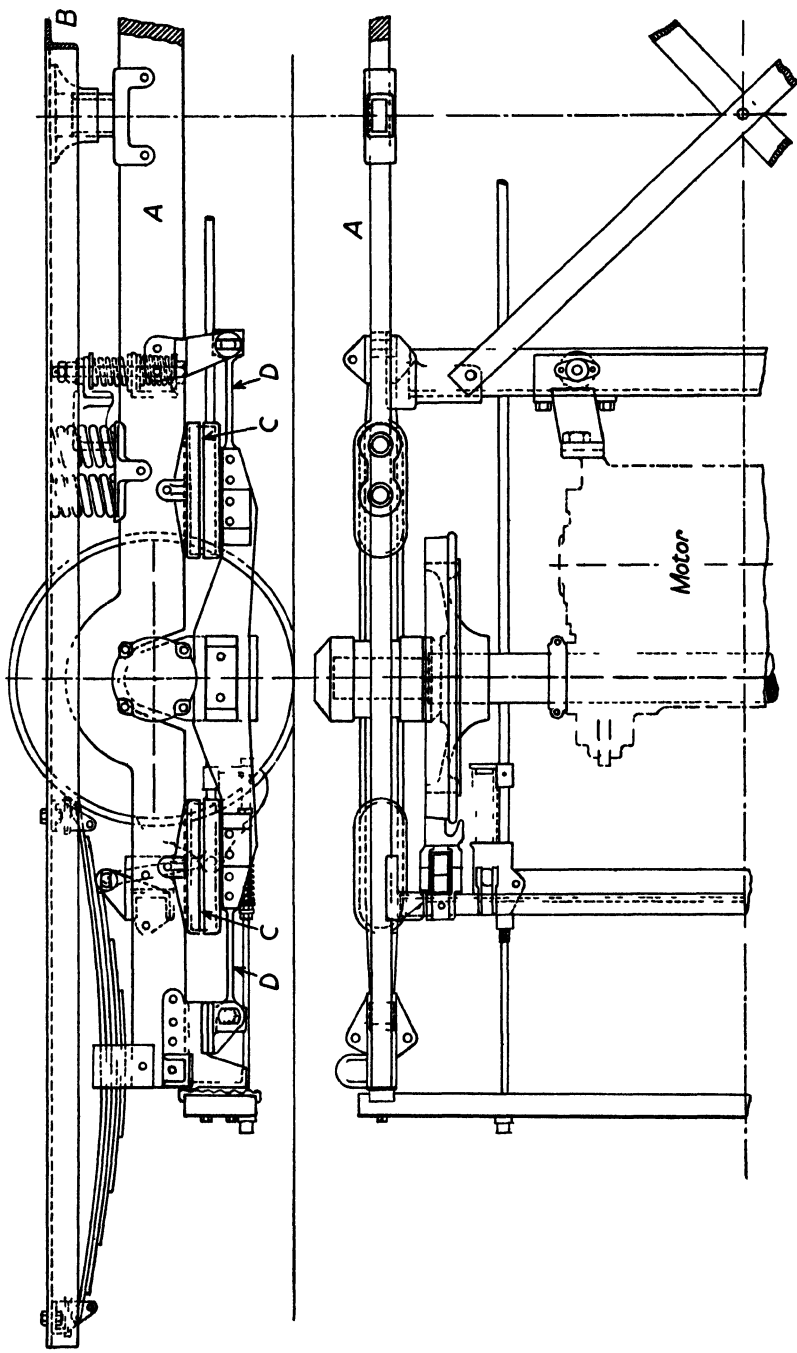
MALEY TAUNTON HORNLESS SINGLE TRUCK (HALF, ELEVATION AND PART PLAN)
